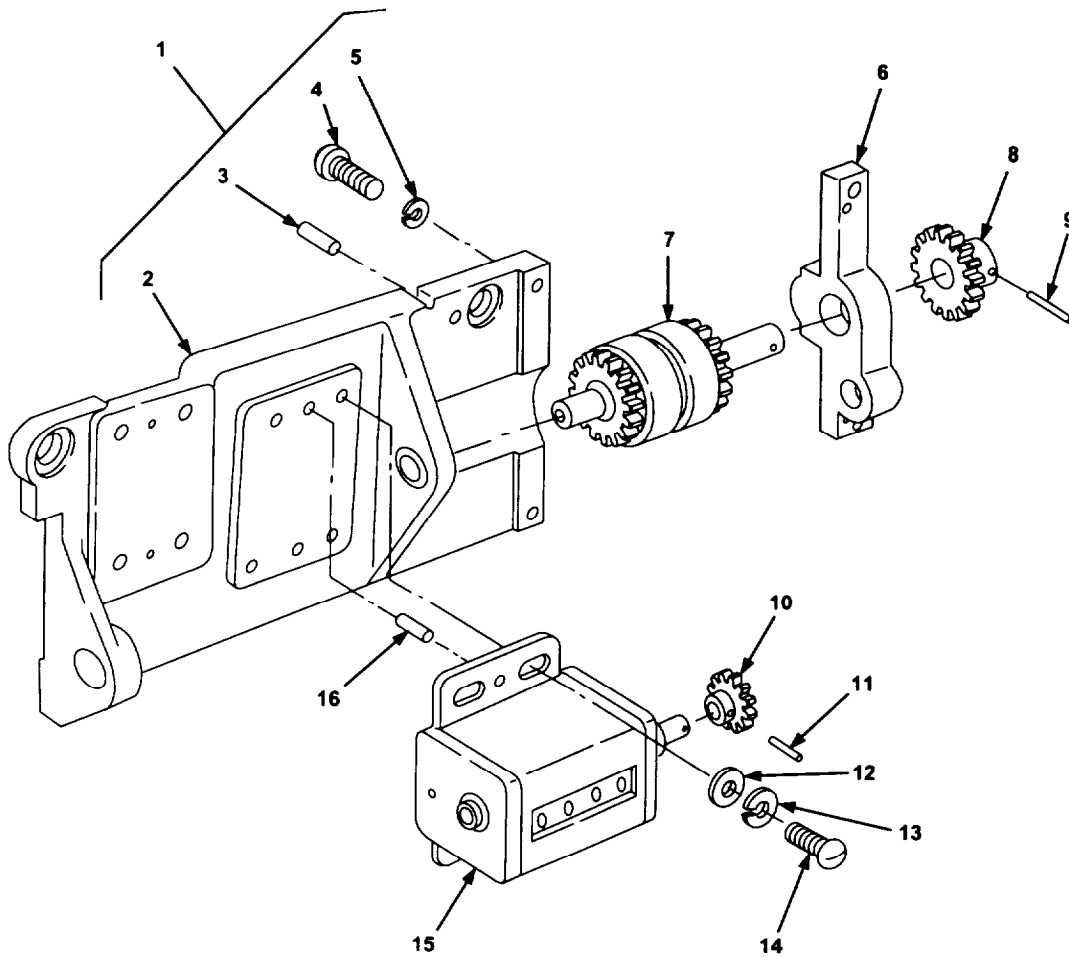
Counter Assembly 8247690 including Base 8247693 - Continued
